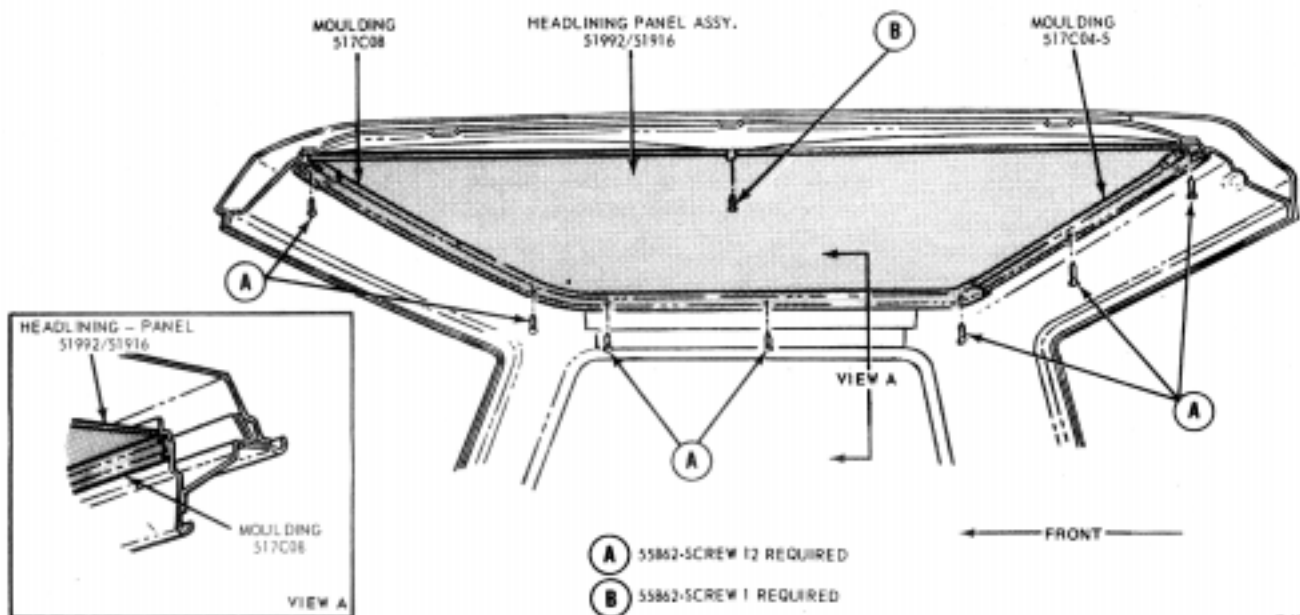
Roof Trim Panel Installation—F-Series Standard Cab
